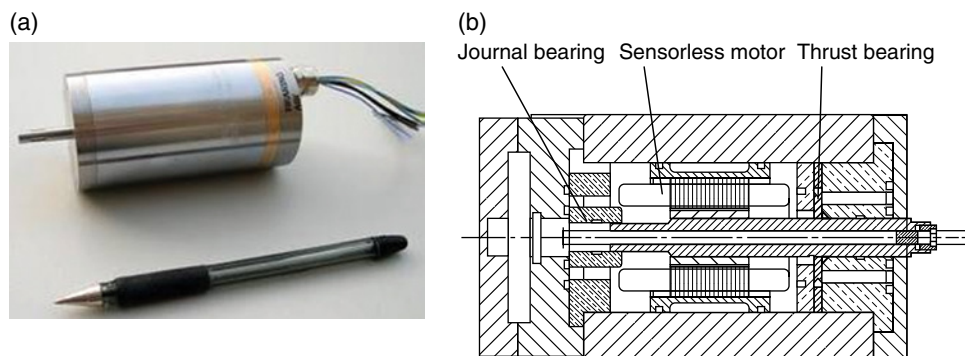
The ultrahigh speed aerostatic bearing spindle driven by a sensorless DC motor (a) photograph of the developed miniature spindle; (b) a schematic of the spindle
